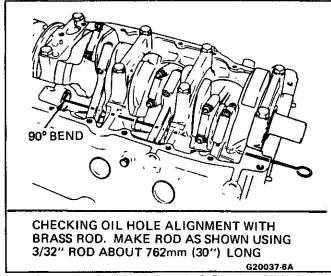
Checking Camshaft Bearing Oil Hole Alignment
